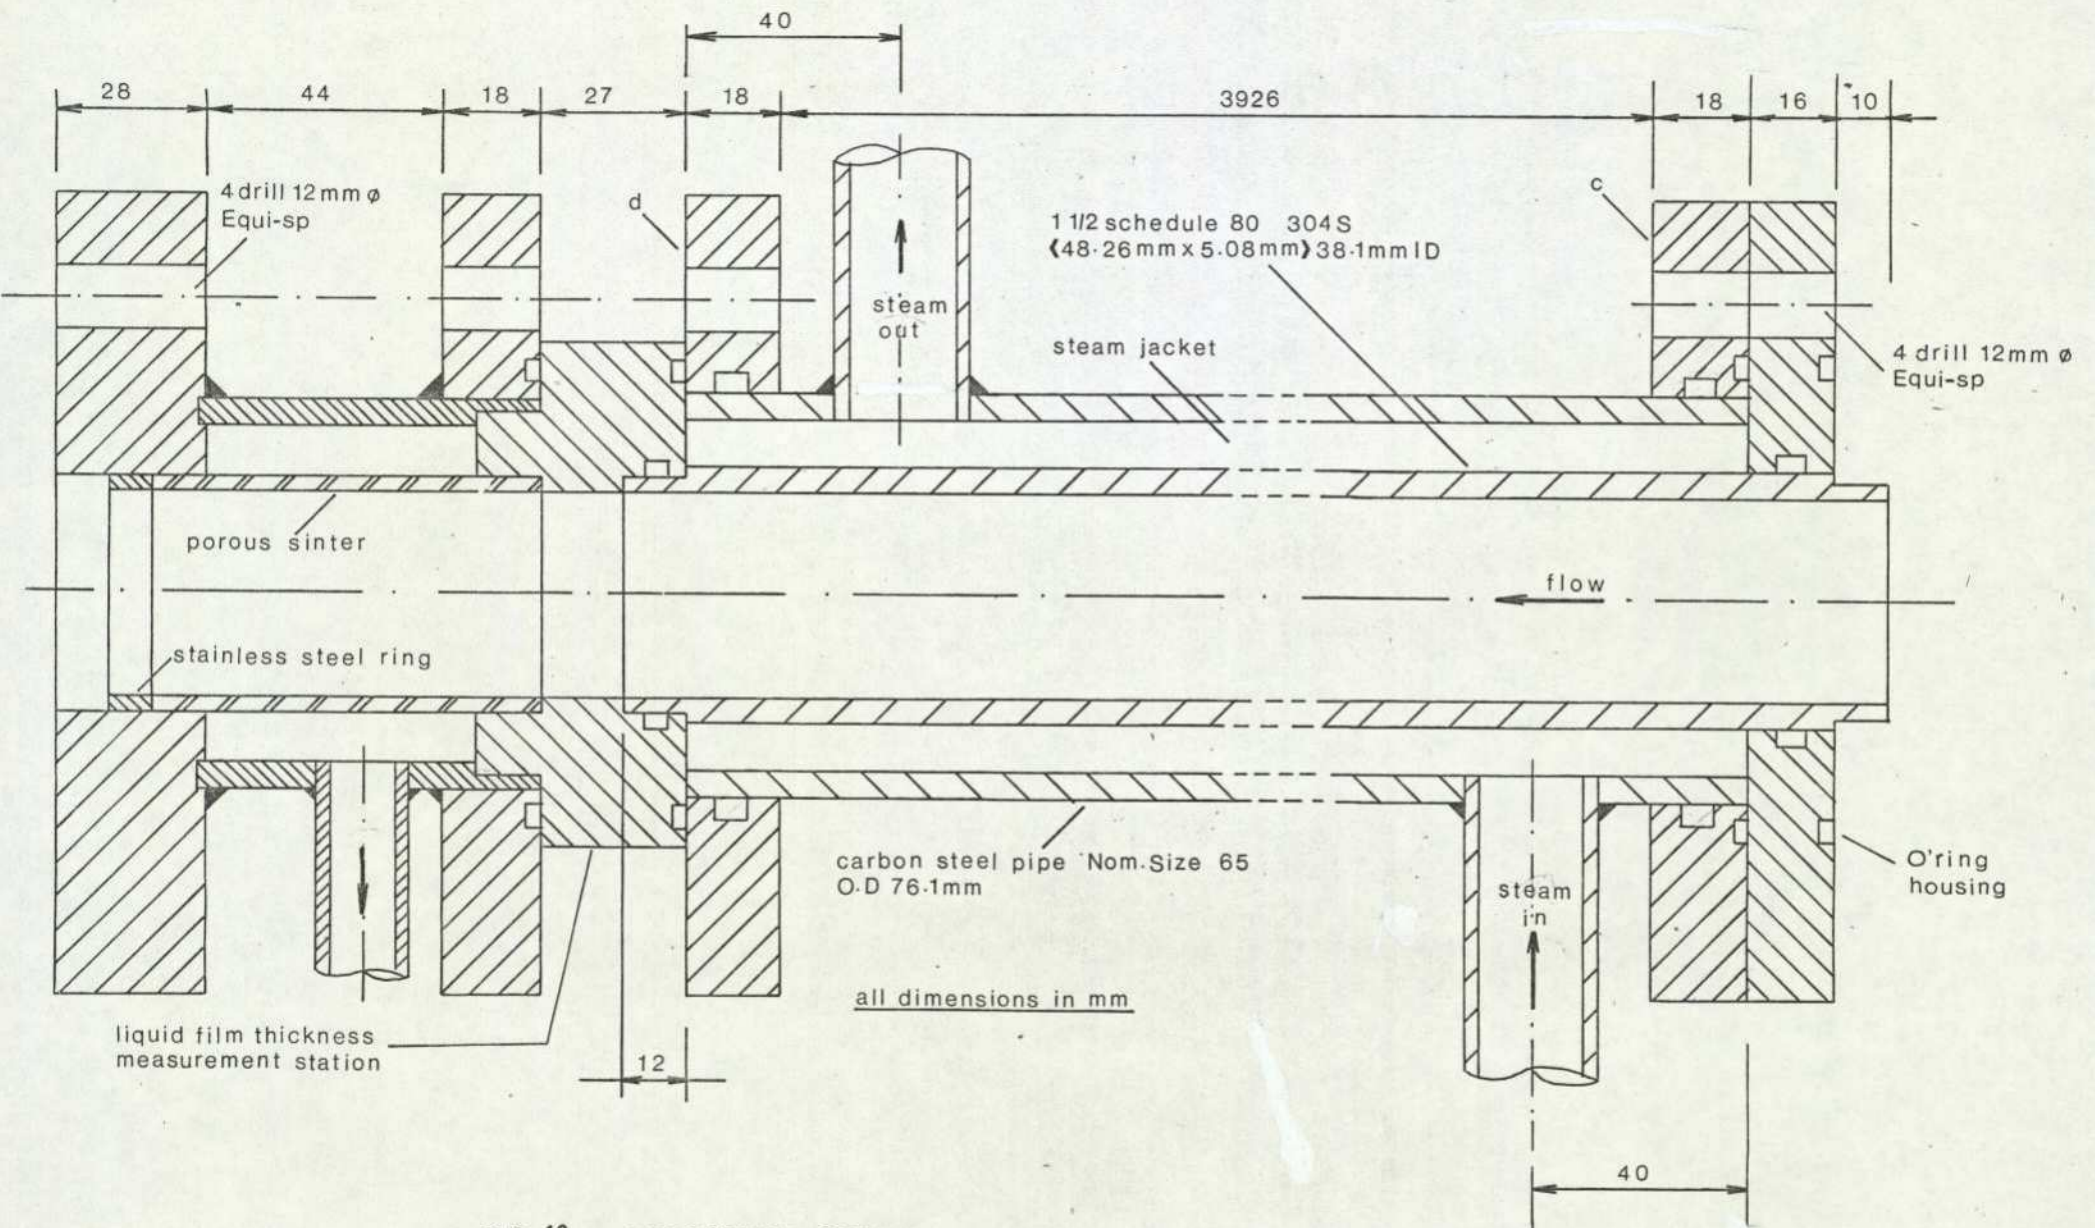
DEPOSITION SECTION AND FILM REMOVAL UNIT ARRANGEMENT
